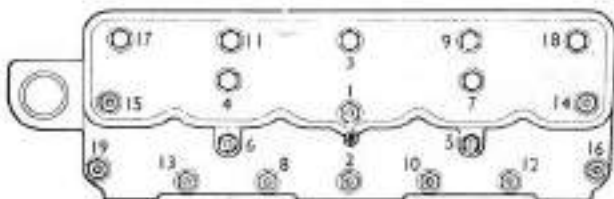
Sequence for tightening cylinder head bolts on four-cylinder engines.
